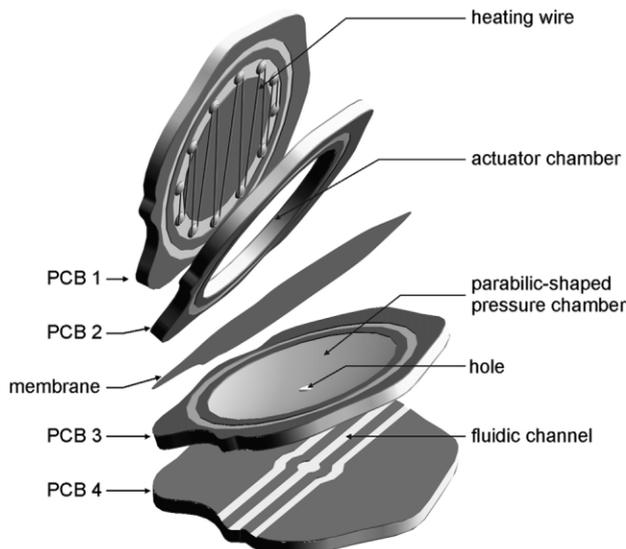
Scheme of a thermo-pneumatic actuator built in PCB technology.
